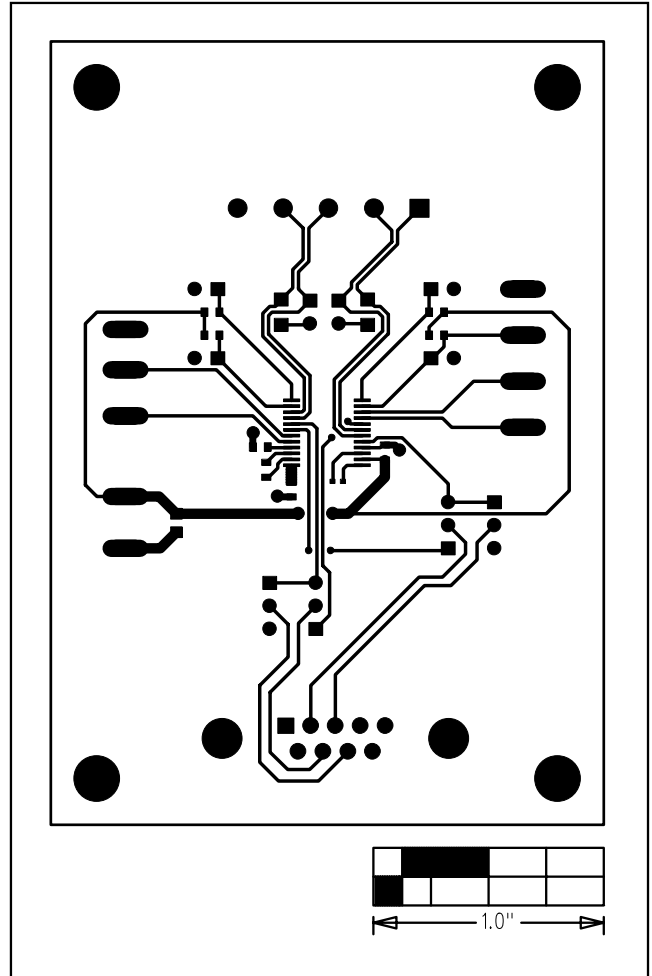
MAX3161E EV Kit PCB Layout—Component Side
